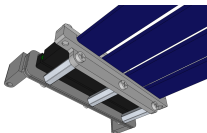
MET-BEZEL-IO146-LOCK Bottom View
